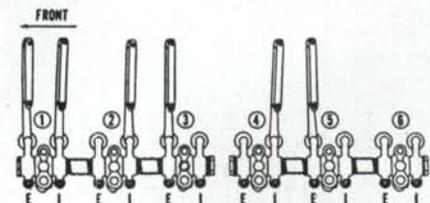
With No. 1 piston on TDC compression stroke on six-cylinder engines, adjust intake and exhaust valve clearance on No. 1 cylinder, intake valve on No. 2 cylinder, exhaust valve on No. 3 cylinder, intake valve on No. 4 cylinder and exhaust valve on No. 5 cylinder. Refer to Fig. 80.
